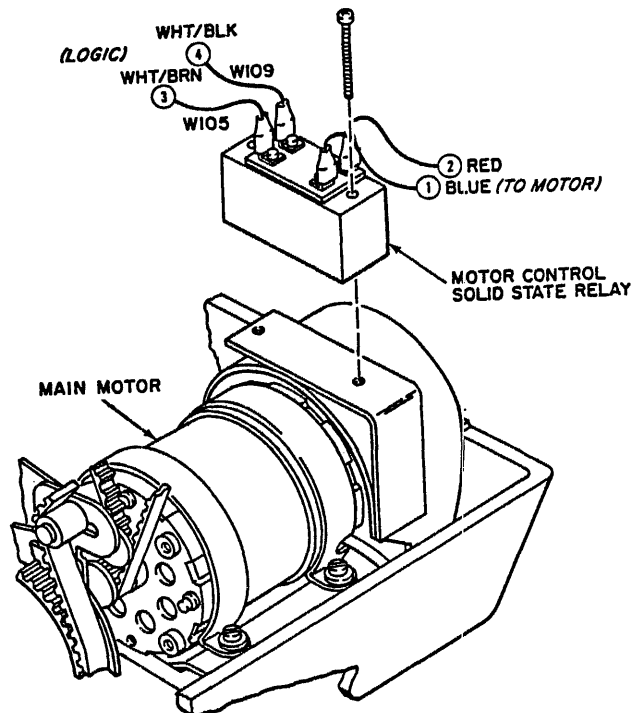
MOTOR CONTROL LOCATION AND INSTALLATION
